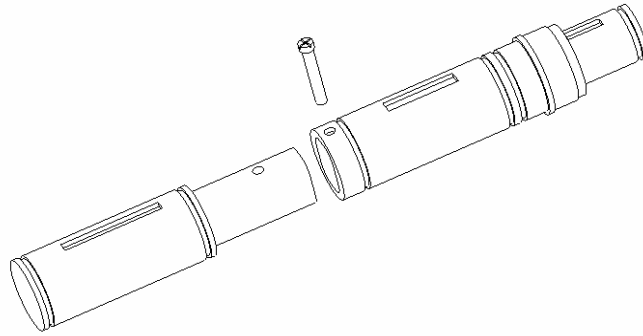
Assembling two shafts for using wheels and tracks at the same time
